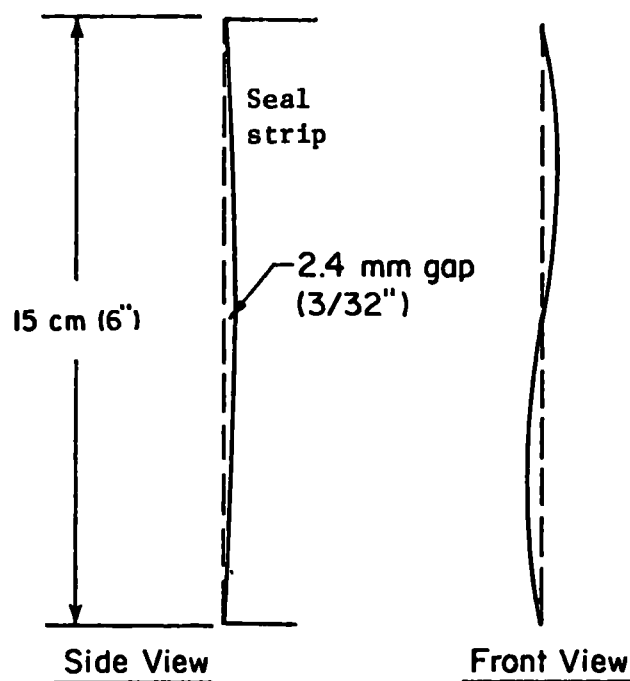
SKETCH OF THE SIDE AND FRONT VIEW OF A SEAL-EDGE BUCKLE AT THE UPPER LATCH AREA OF A PUSHER-SIDE DOOR
